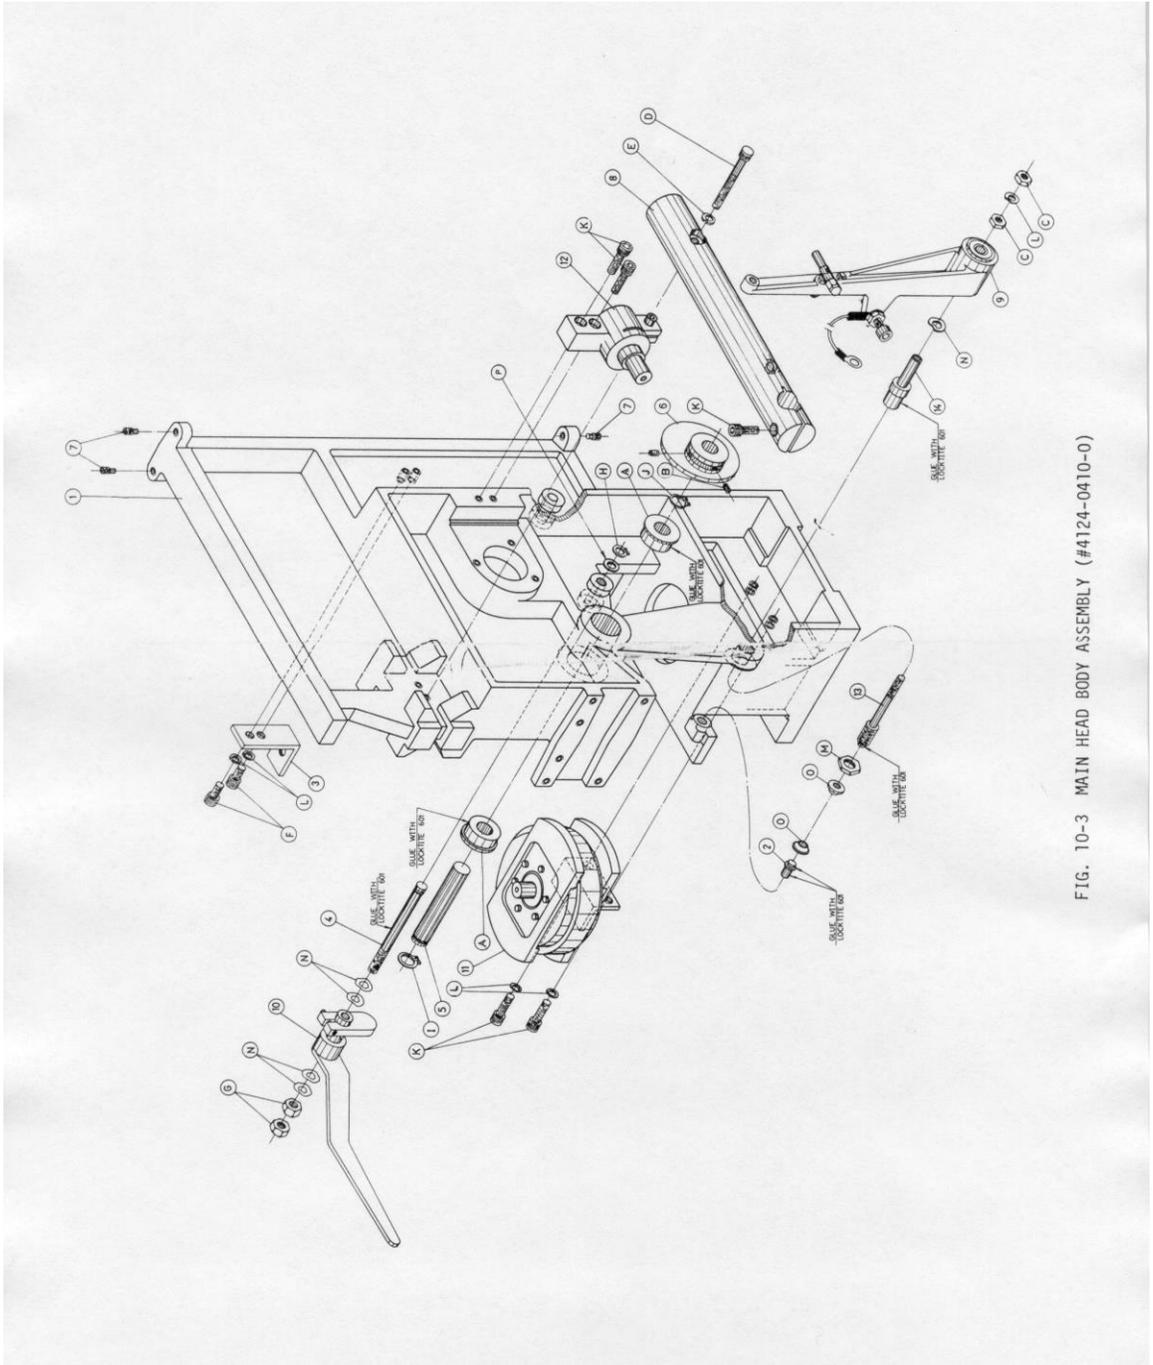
MAIN HEAD BODY ASSEMBLY (#4124-0410-0)
